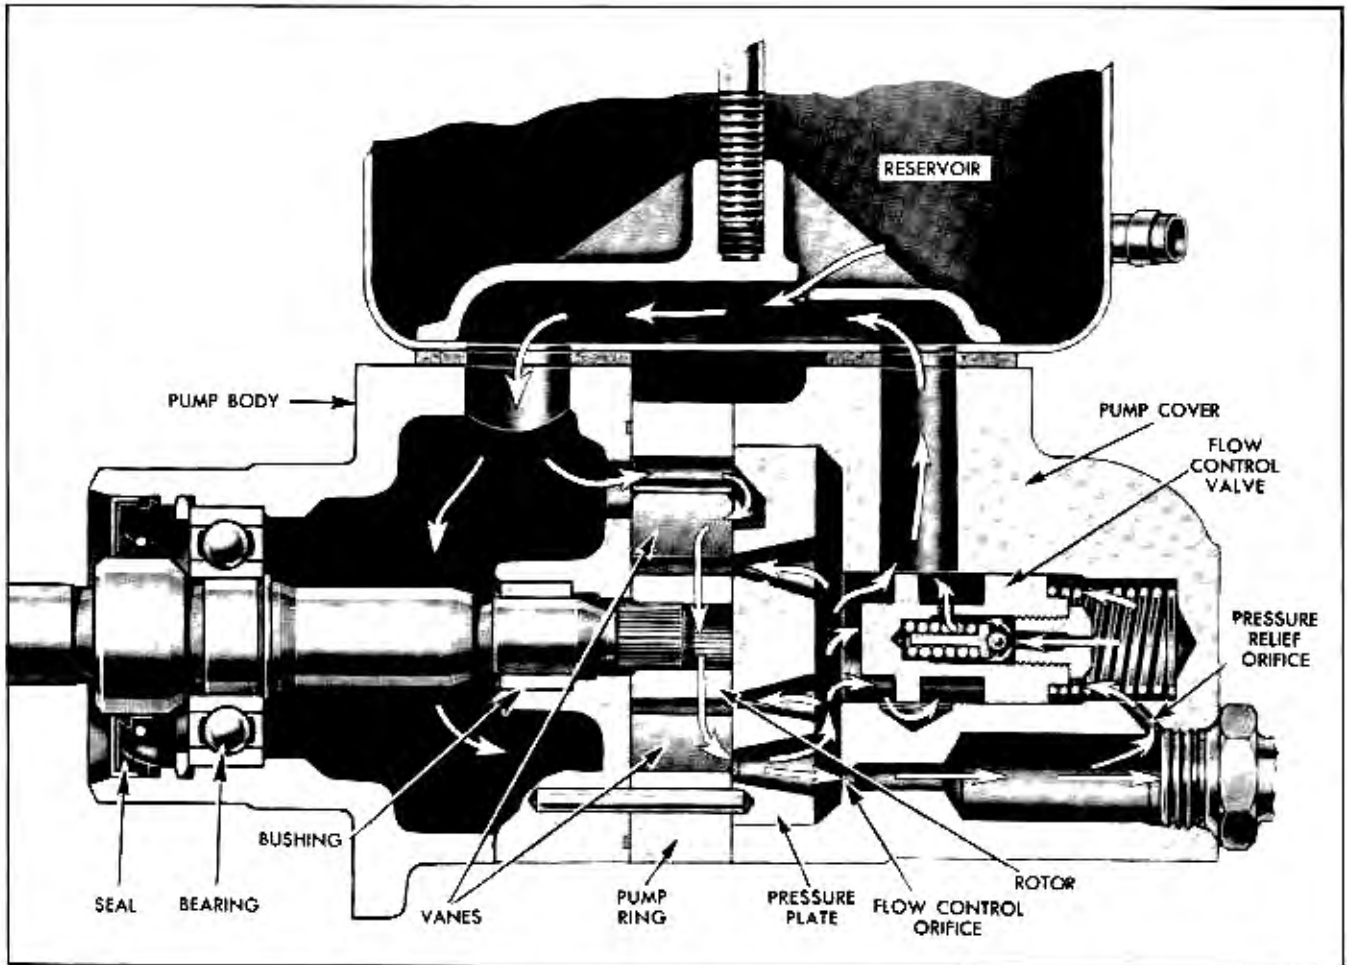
Power Steering Pump. Steering Wheel Turned Against Resistance- Schematic View
